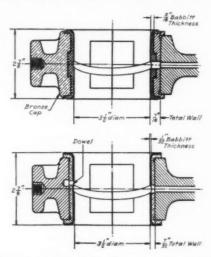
BEARING FOR HEAVY-DUTY MACHINE IN WHICH WALL THICKNESS AND BABBITT LINING WERE REDUCED BY REDESIGNING (Original design using dovetails is shown in the upper drawing, and the bearing after being redesigned to use an insert is shown underneath.)
